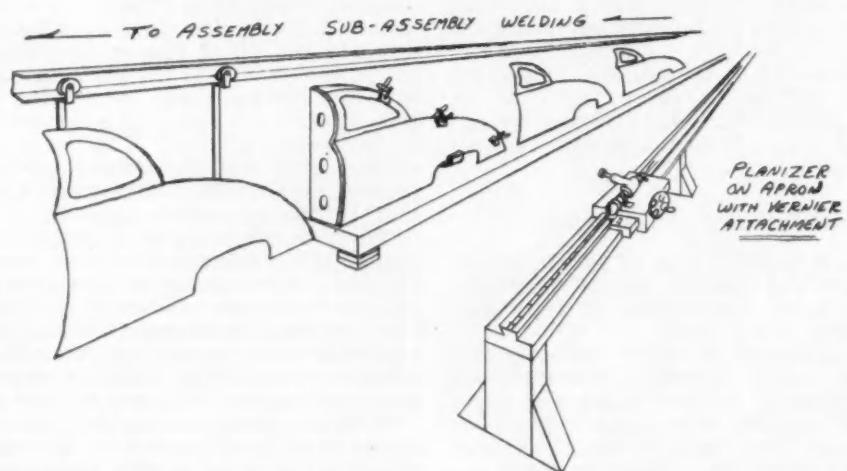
Automotive body assembly automation, built, checked, and maintained by optical methods
